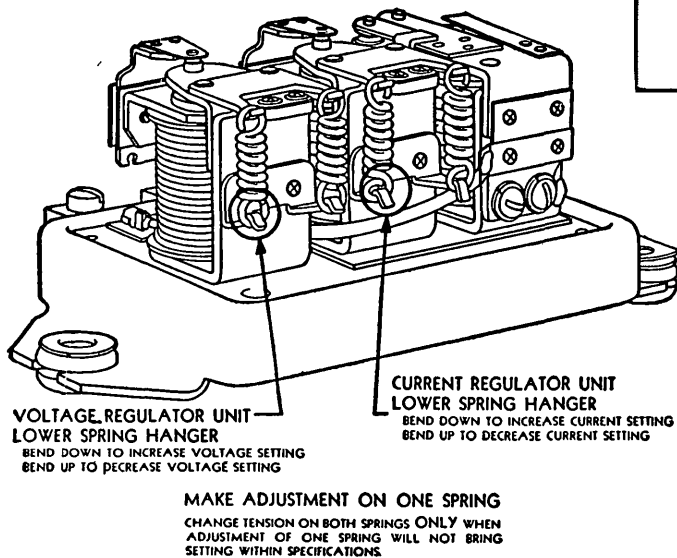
Electrical settings of Delco-Remy single core regulators which are adjusted by bending spring hangers
